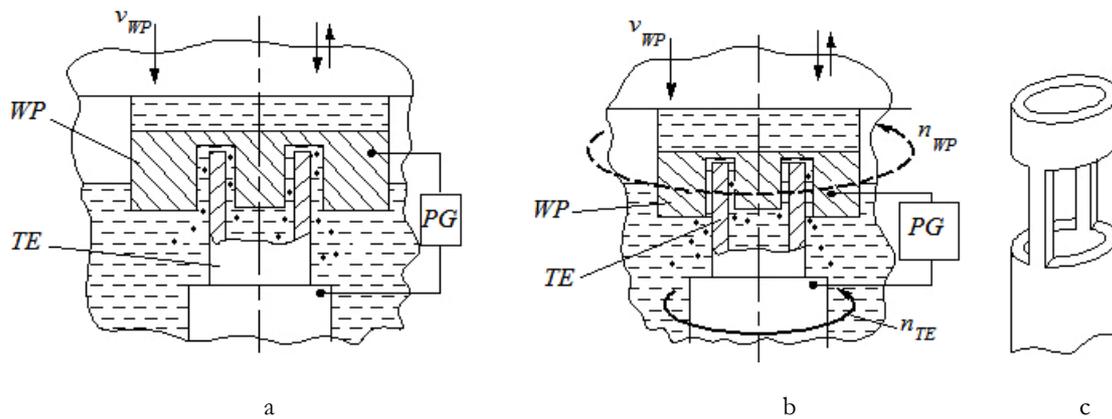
Improved solutions of detaching cylindrical part by electrical discharge machining: a - machining schema without tool electrode rotation motion; b – machining schema by use of a supplementary tool rotation motion; c – tool electrode modified in order to increase the machining accuracy.
